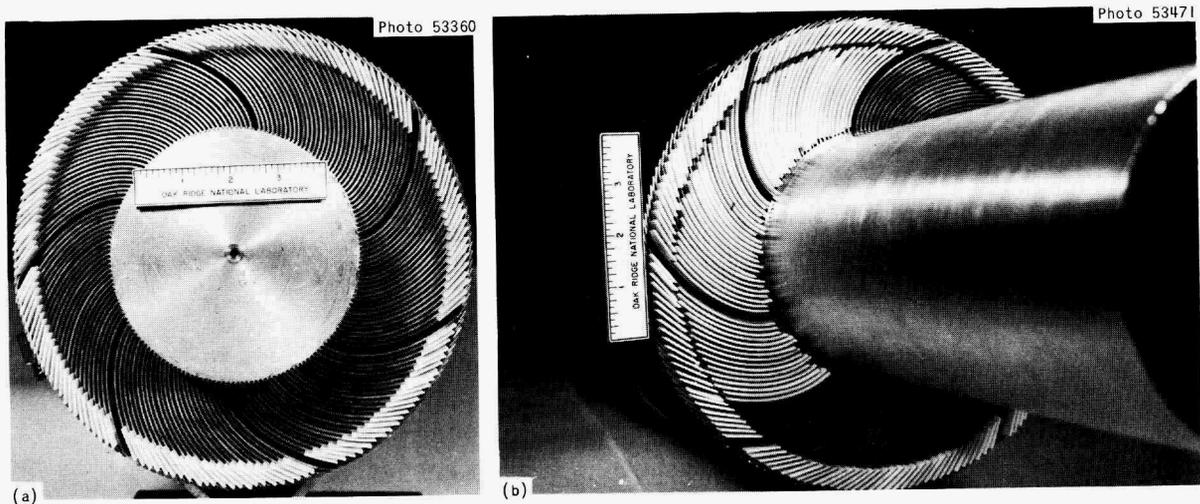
Assembled Inner Annulus. (a) As assembled. (b) After insertion of additional spacers to improve plate spacings.
